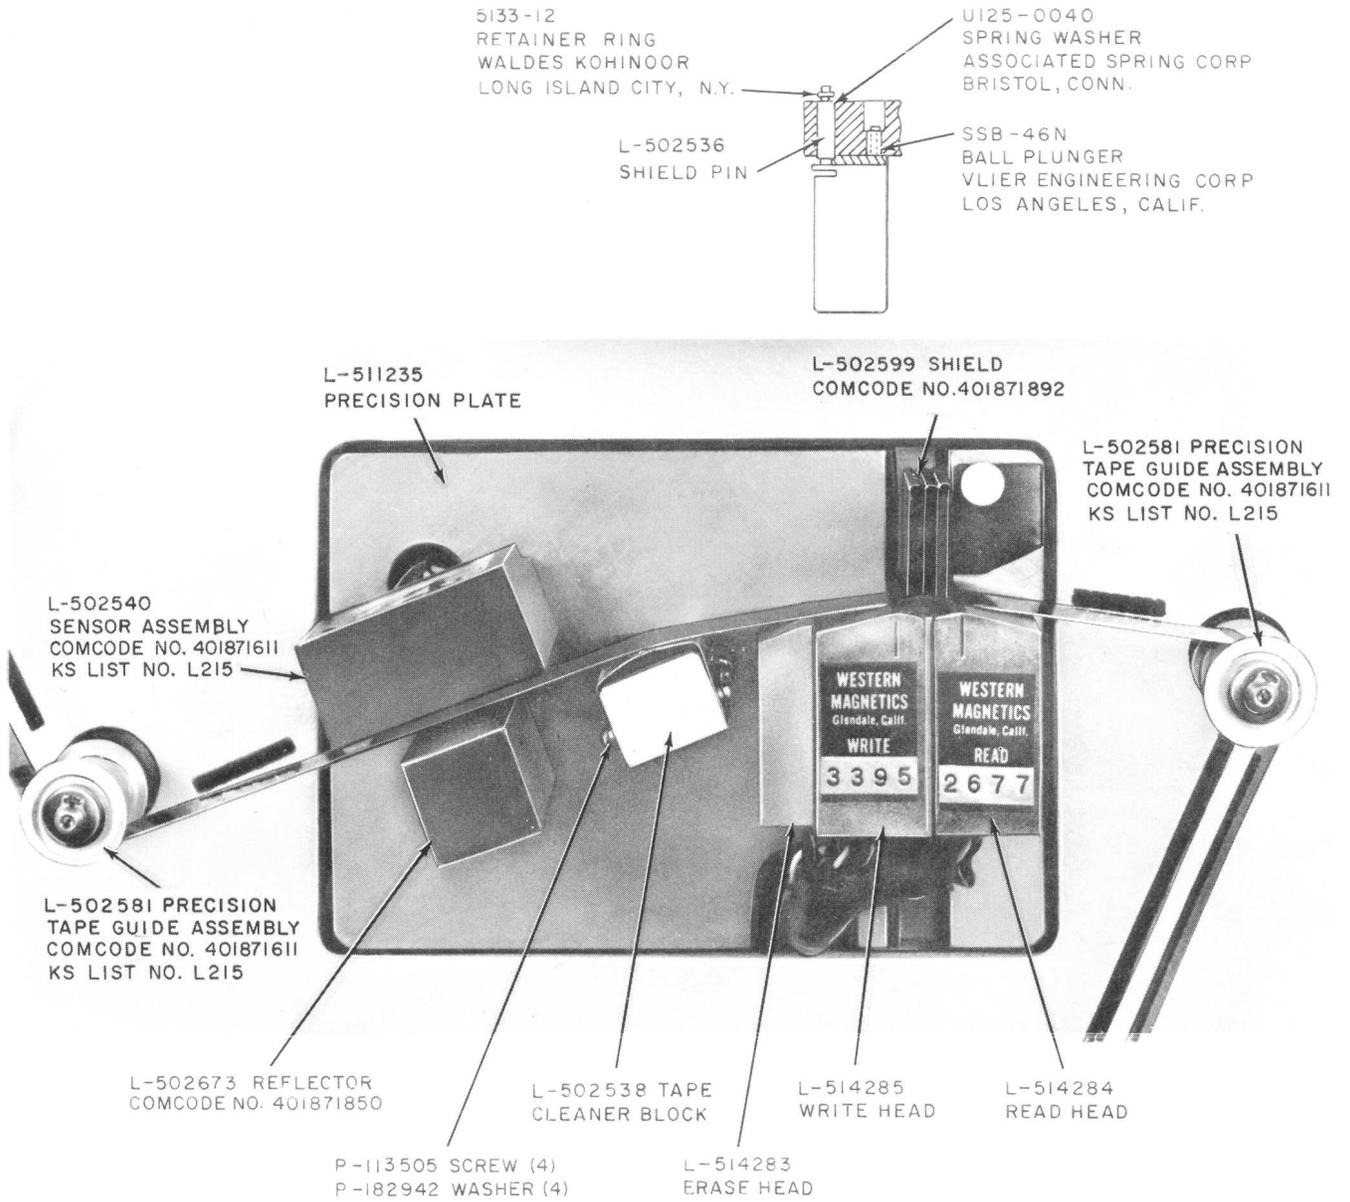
Partial Front View of KS-20571, L3, Tape Transport Showing Tape Path Components
